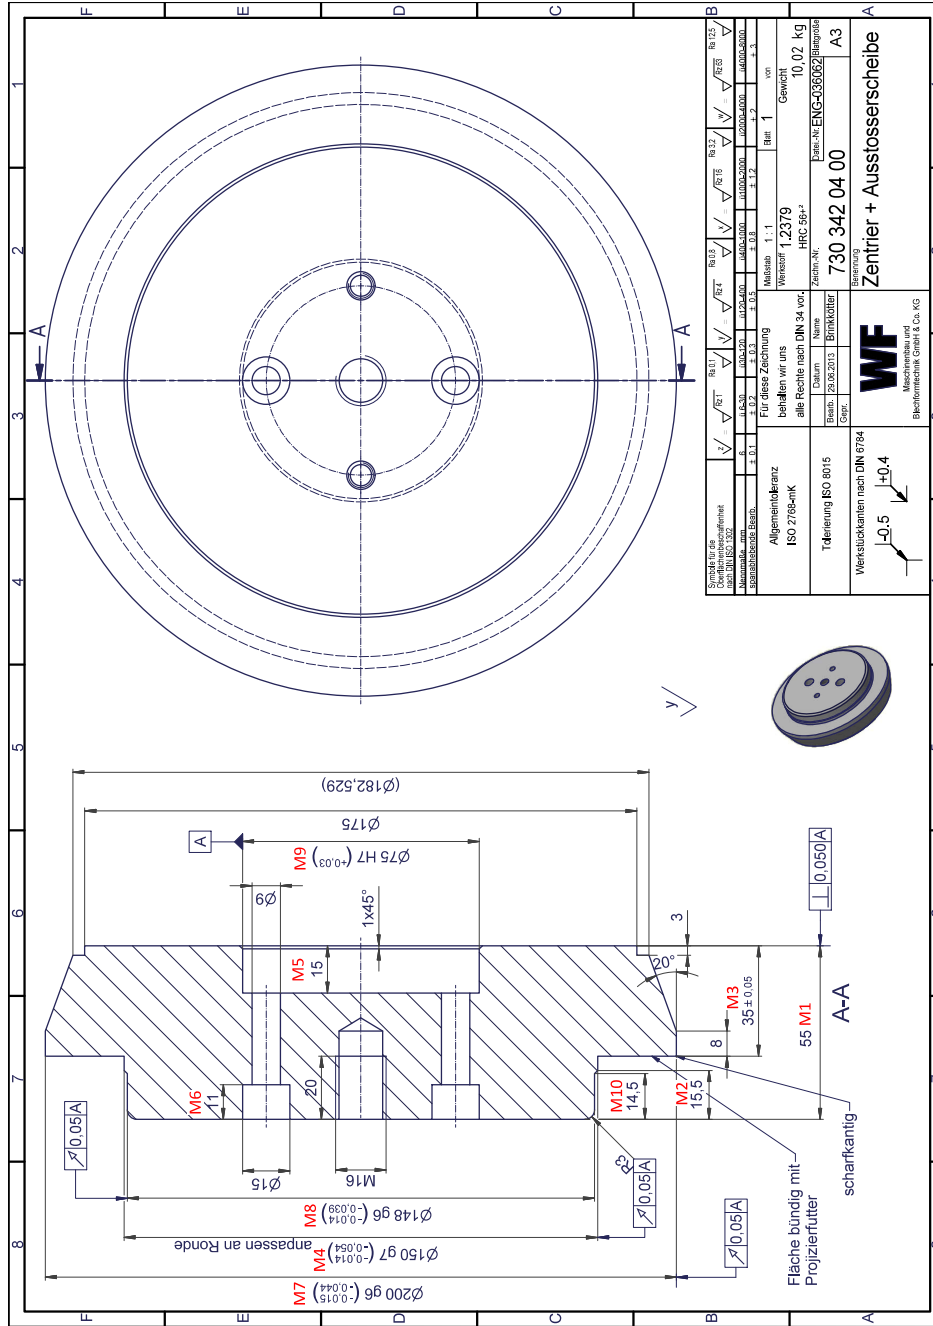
Drawing: Mandrel insert – 31.5°, for blanks up to 6 mm thick – 730 342 04 00, “Zentrier + Ausstosserscheibe”<sup>4</sup>.
